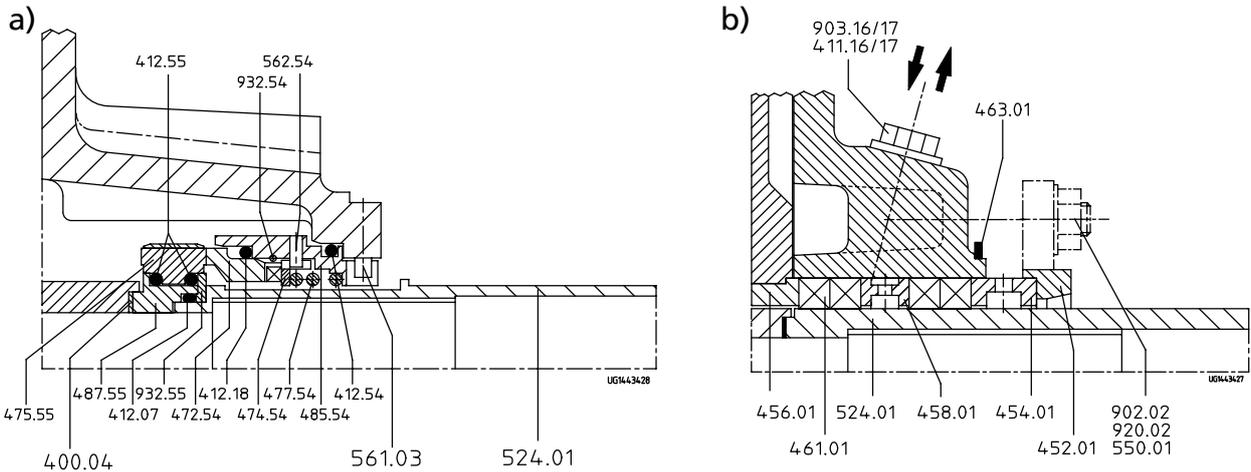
Shaft seal P03ax to P12sx: a) HRZ mechanical seal; b) coolable gland packing
